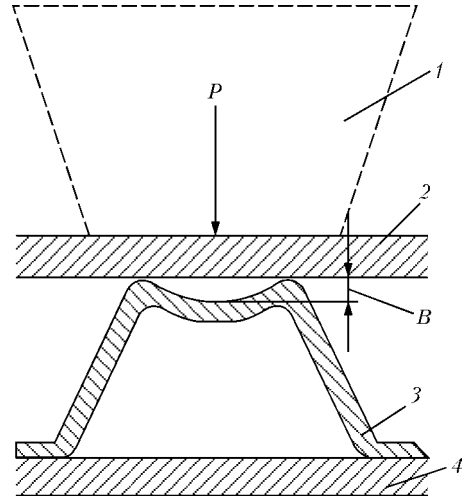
Schematic of formation of gap B in the location of ASW of a three-layer panel: 1 — welding torch; 2, 4 — panel skin; 3 — cellular filler
